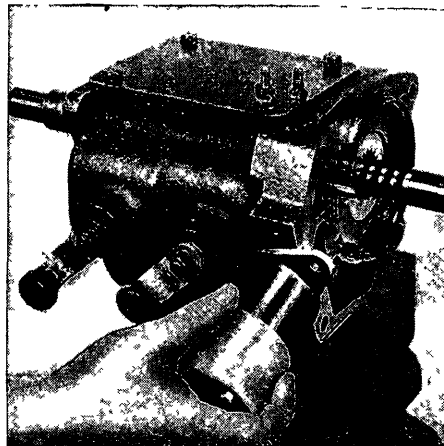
Remove attaching screws, rotate solenoid 1/4 turn and take off
